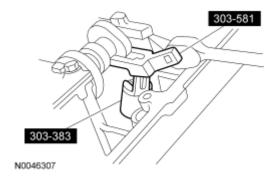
Installing Valve Stem Seals Courtesy of FORD MOTOR CO.
